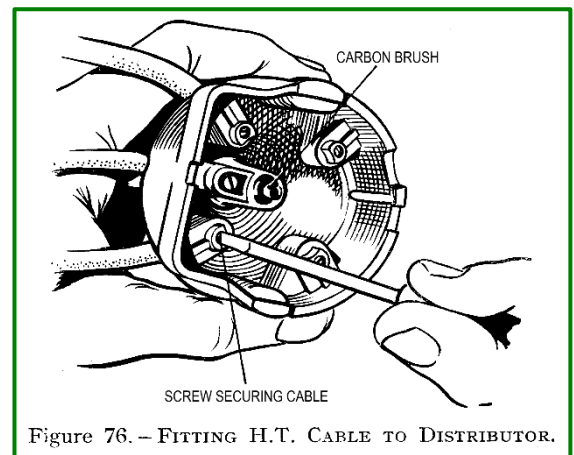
FITTING H.T. CABLE TO DISTRIBUTOR.
